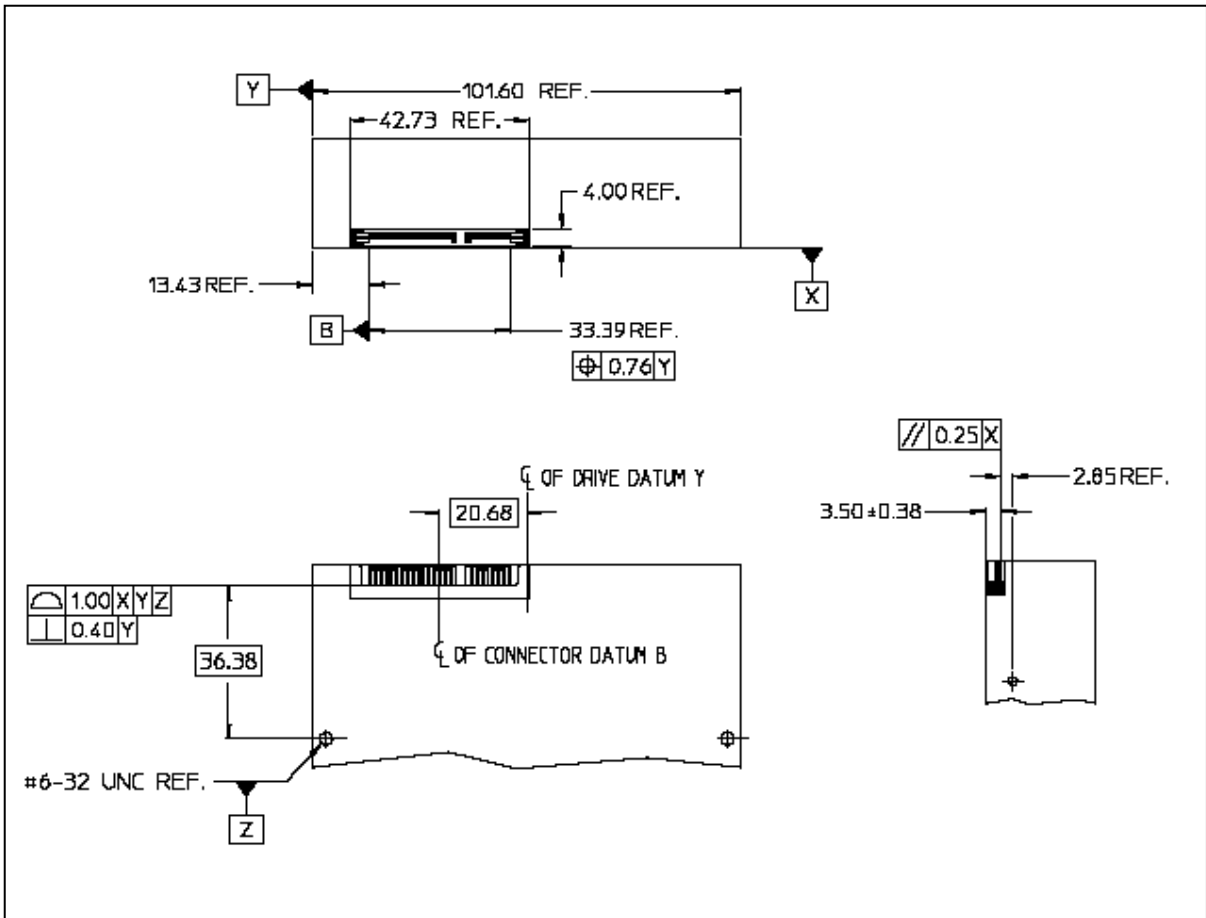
Device Plug Connector Location on 3.5" Bottom Mounted Device
